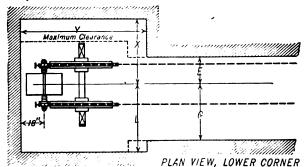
GENERAL DIMENSIONS OF 24-INCH PITCH CARRIERS (PLAN AT RISE).
